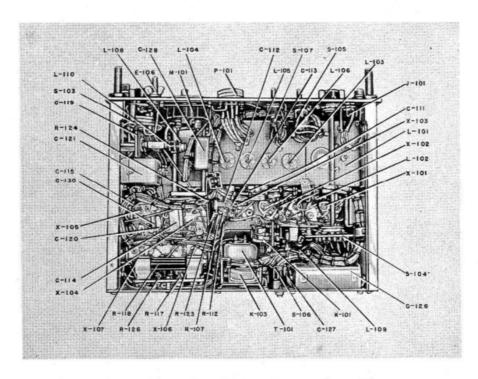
Transmitter Unit — Bottom Open View (older model shown; see note for Fig. 1)
